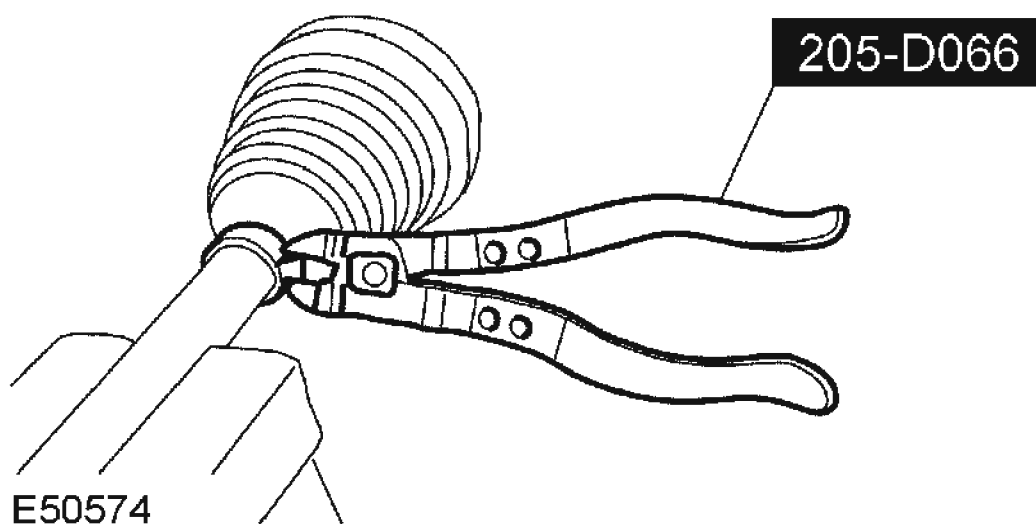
Installing CV Joint Boot Retaining Inner Clamp Using Special Tool
